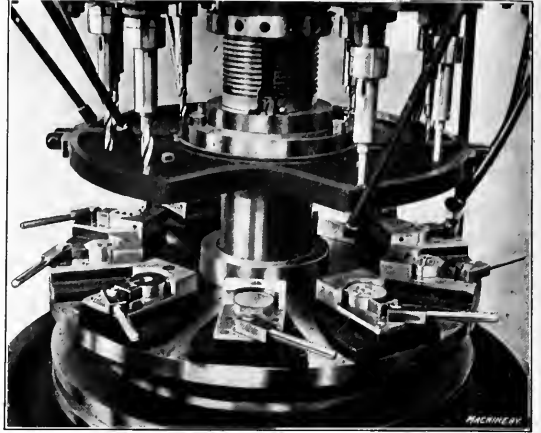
Close View of Work Table and Bushing Holders shown in Fig. 1.
